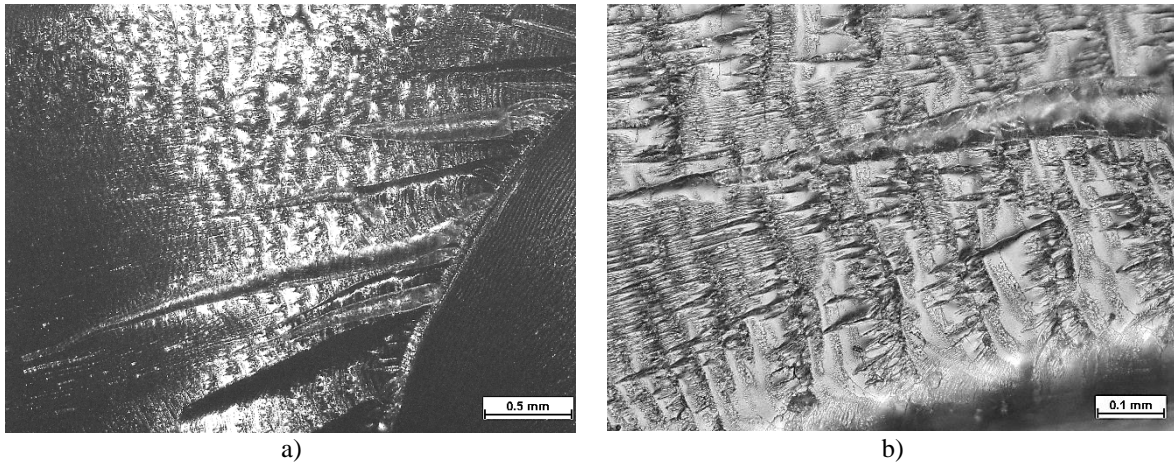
Morphology of the fracture surfaces of the PLA samples after mechanical testing: impact fracture surface at a) 2.5x and b) 10x
